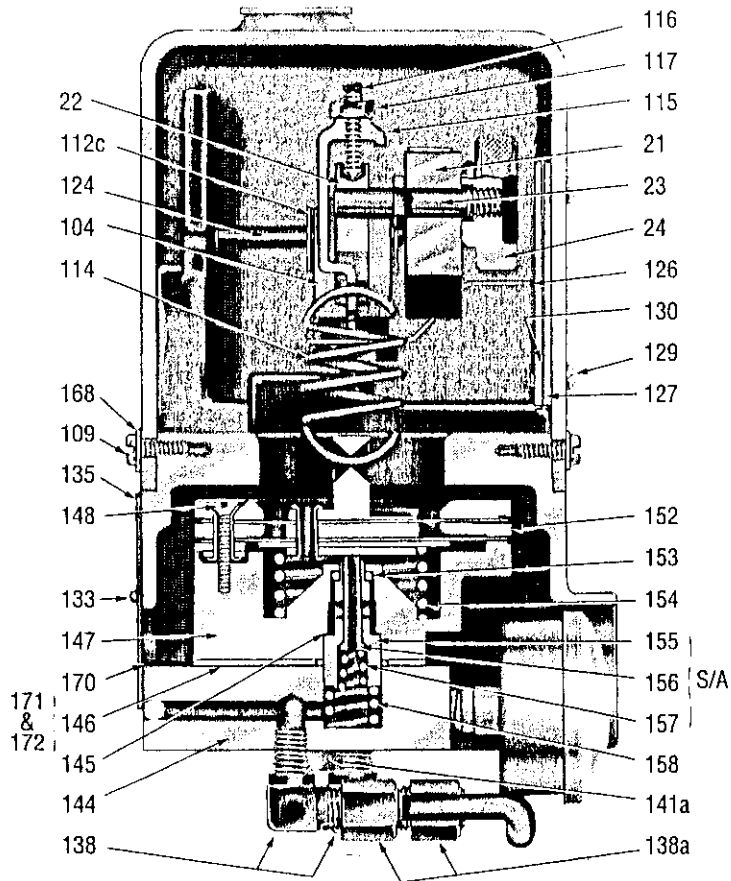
Cross section of the VariPak actuator and its pneumatic positioner.
